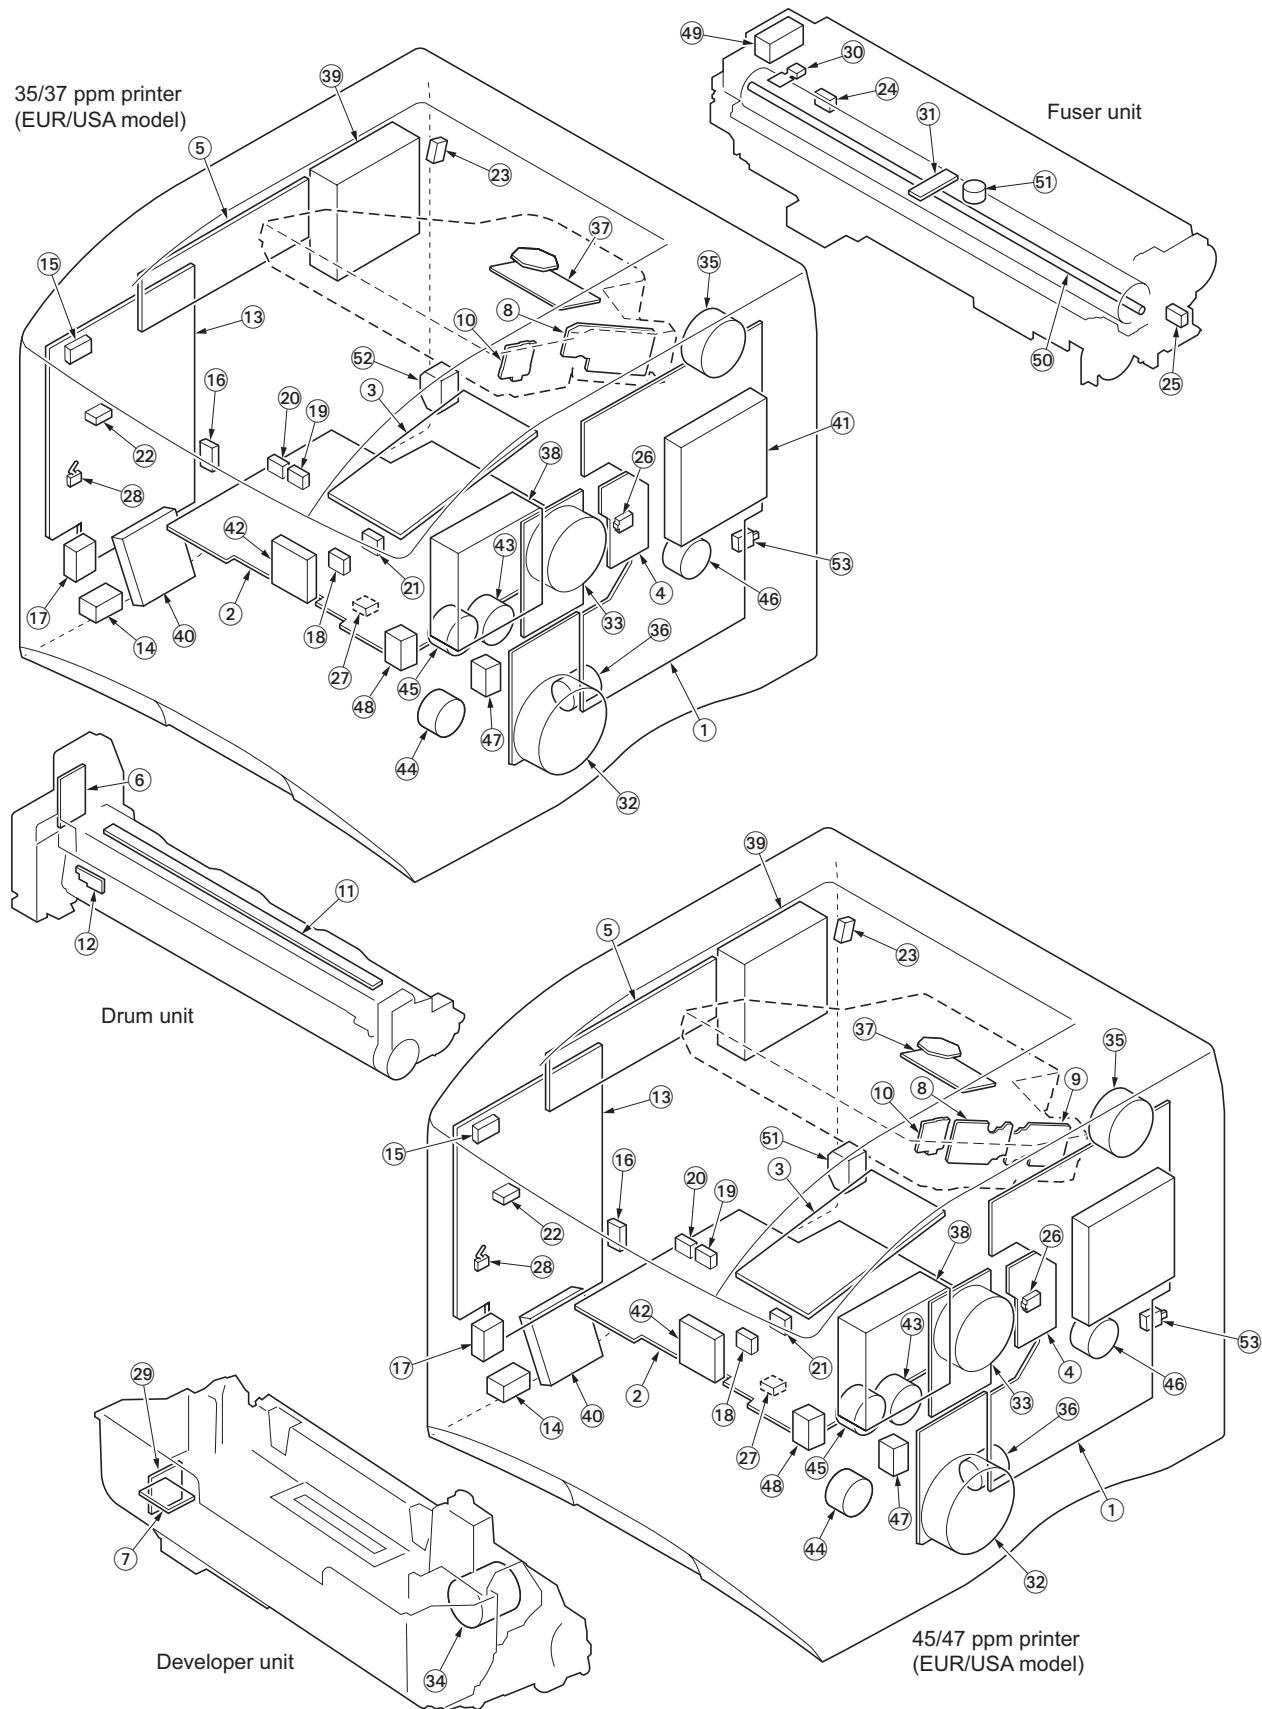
Electrical parts layout (35/37 and 45/47 ppm printer [EUR/USA model])
